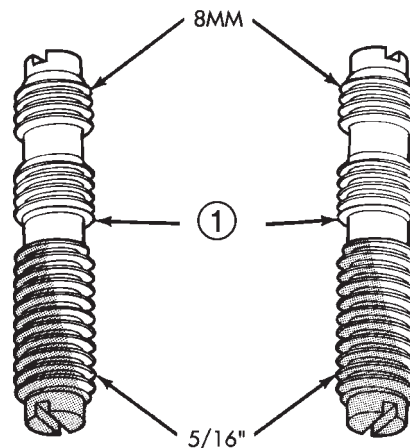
Valve Spring Compressor MD-998772A with Adaptor 6716-A and Screw 6765
